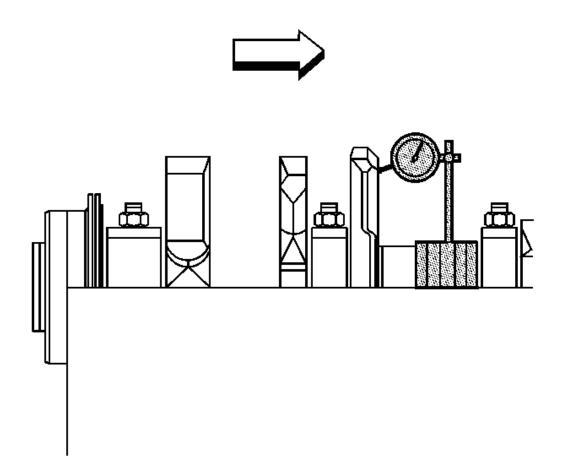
Measuring Crankshaft End Play Using J 7872 Courtesy of GENERAL MOTORS CORP.
